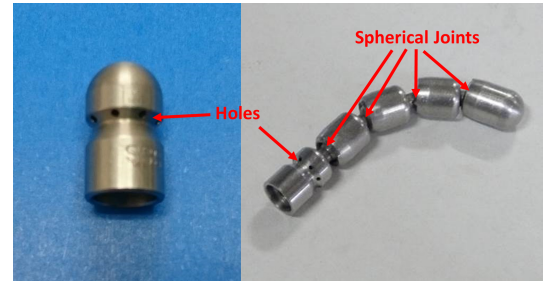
Simple nozzle (left). Passive jointed nozzle (right).
